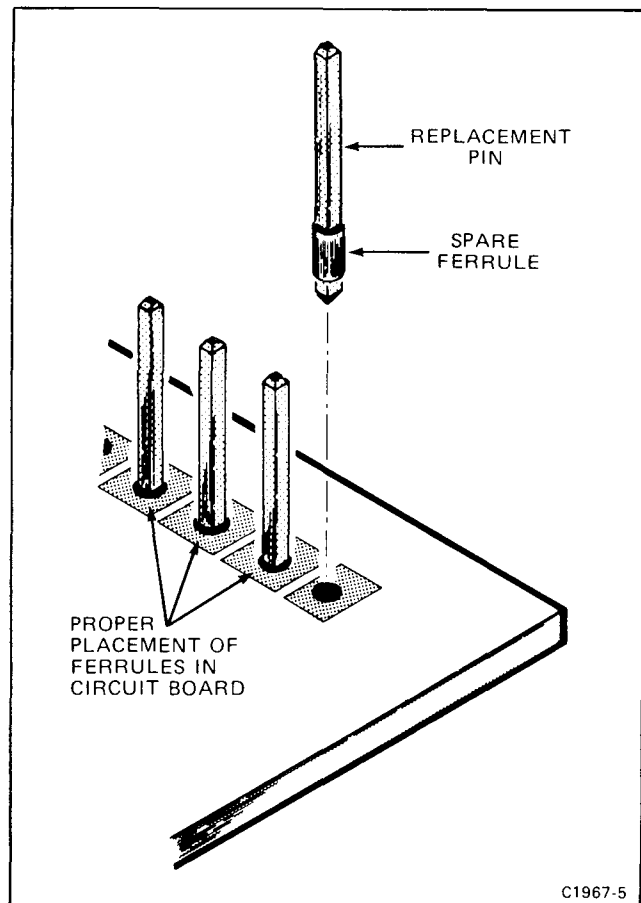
Exploded view of circuit-board pin and ferrule.
